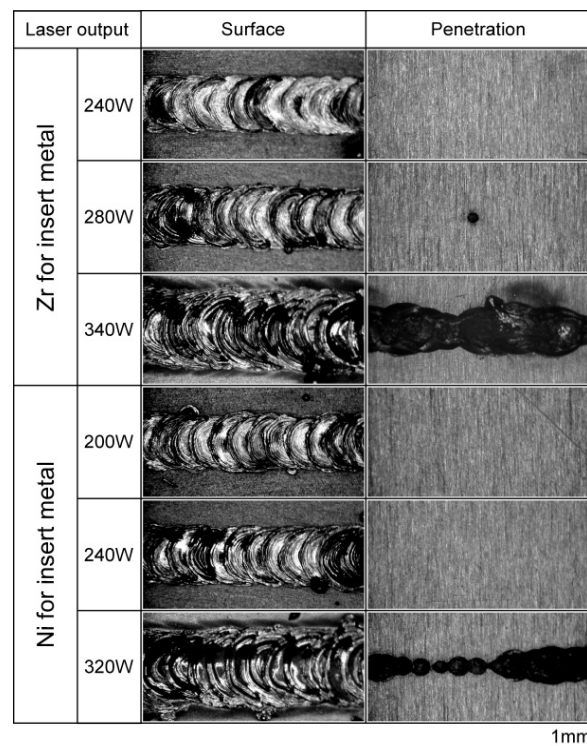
Bead appearances of welded joints(PW=7.5ms).
